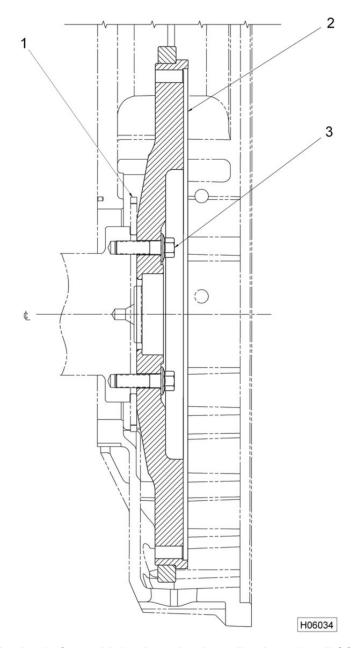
15.5 inch flywheel - for multiple plate clutch applications (800 lbf·ft and above)
